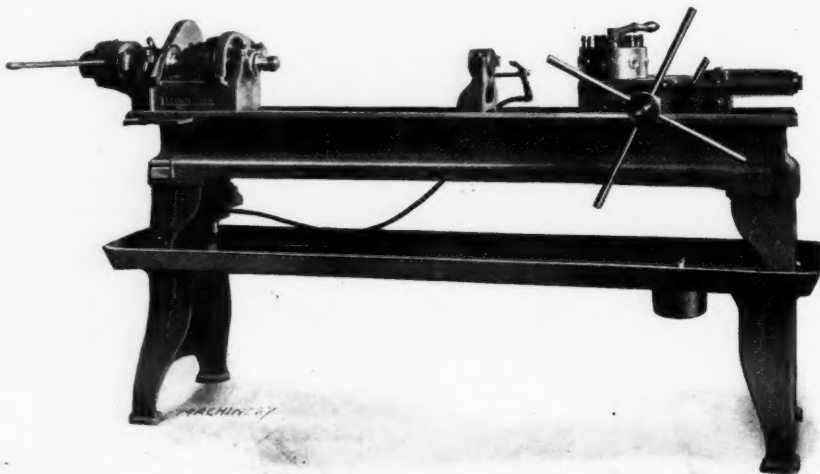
Machine designed for Use in machining Chamber in Rifle Barrels
